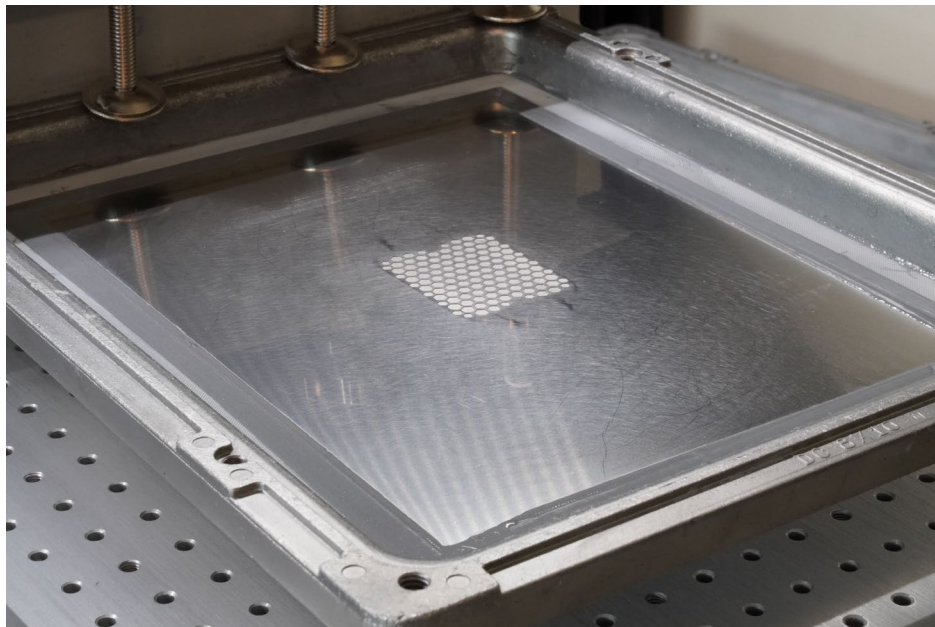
Module in Fixture with Stencil-to-Mounting Surface Full Contact
